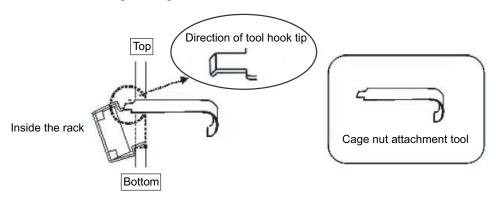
shows a cage nut hooked on the lower part of a hole.
